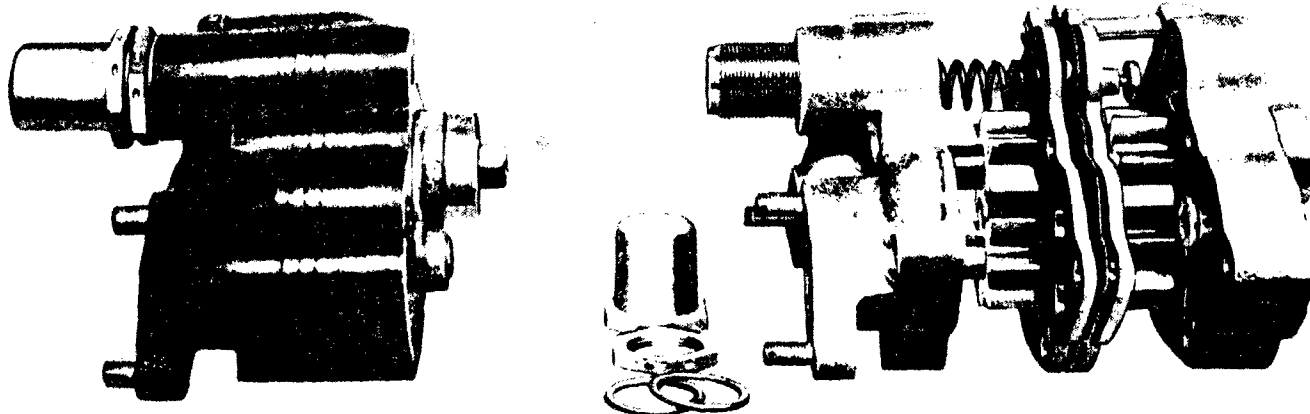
Duplex Pressure and Scavenge Oil Pump for W670 Engine
